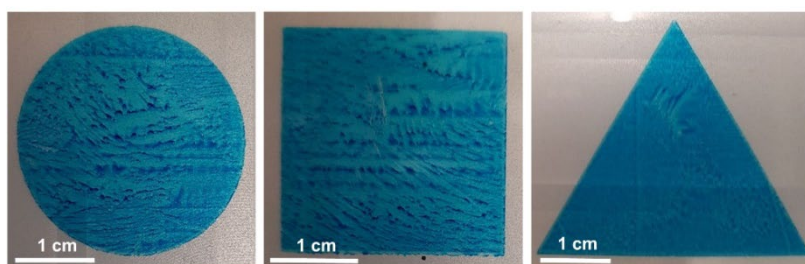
Exemplary illustration of printed geometries from F1 ink using SP print head (used from Kiefer et al. [176], by courtesy of Elsevier)
